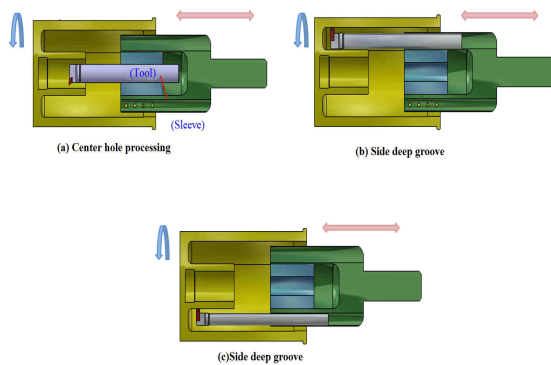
shows the proposed mill turret tool holder and sleeve. The mill turret consists of a sleeve, holder, and cutting tool. To replace the existing dampening bars used to absorb vibration, a product holder was made.
